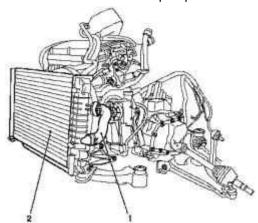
Disabling the module heatsink: 1 - coolant hose, 2 - module heatsink
